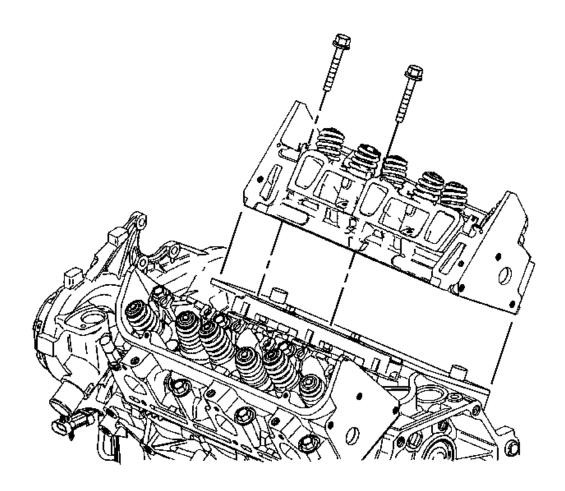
Removing Right Cylinder Head Courtesy of GENERAL MOTORS CORP.
